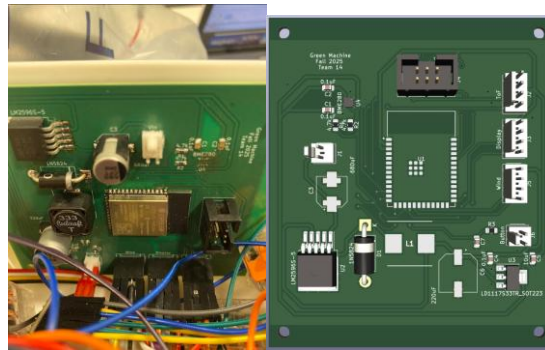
Main PCB mounted within enclosure (left) and 3D model of PCB (right)
